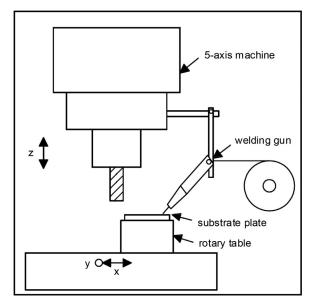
Schematic of hybrid welding/milling equipment (Reprinted from [141] with permission from the authors).
